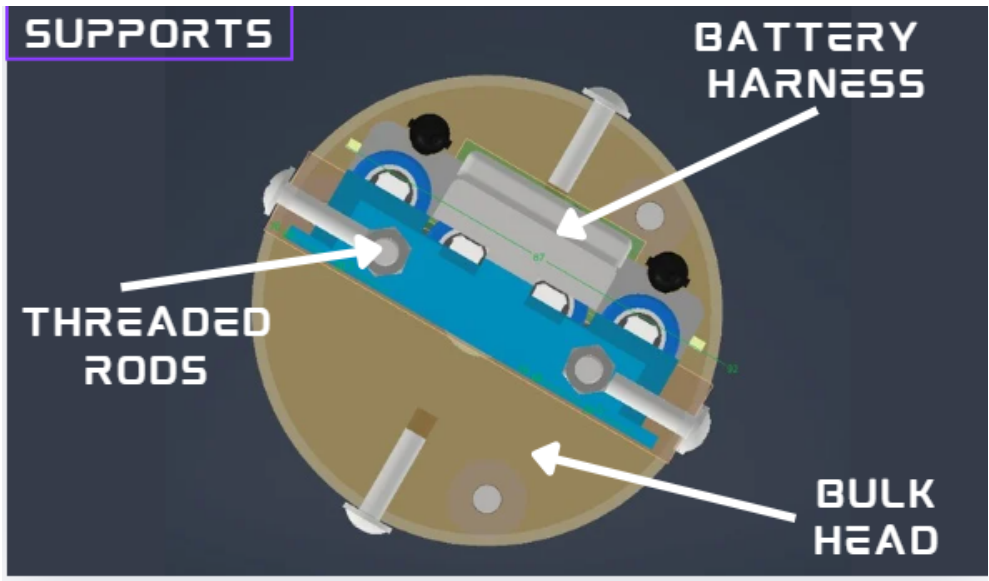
Labelled cross-sectional view of the avionics bay showing component stacking, retention rod paths, and internal clearances. Authors’ own CAD.
